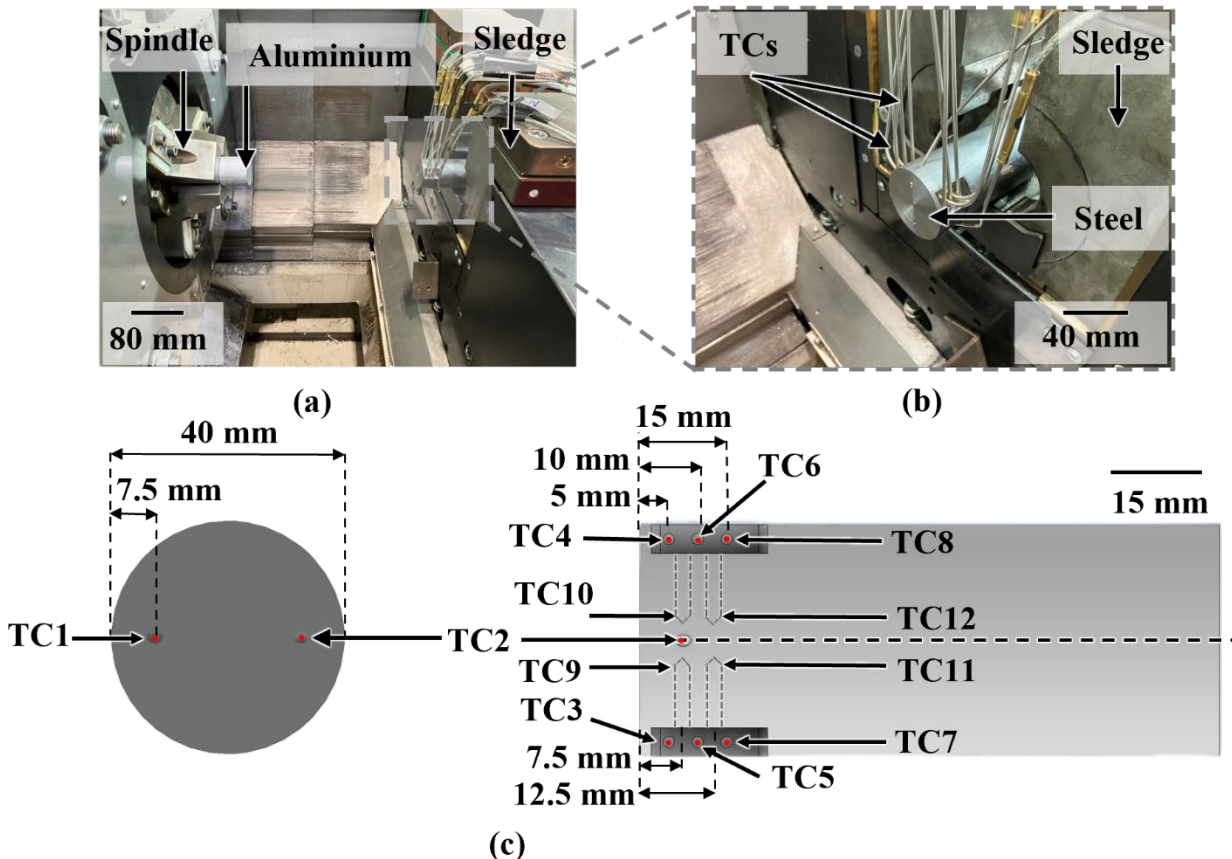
(a) Configuration and positioning of the steel and aluminium specimens during the welding process; (b) steel specimen with TCs prior to welding and (c) schematic illustration of TC positions with annotations.
